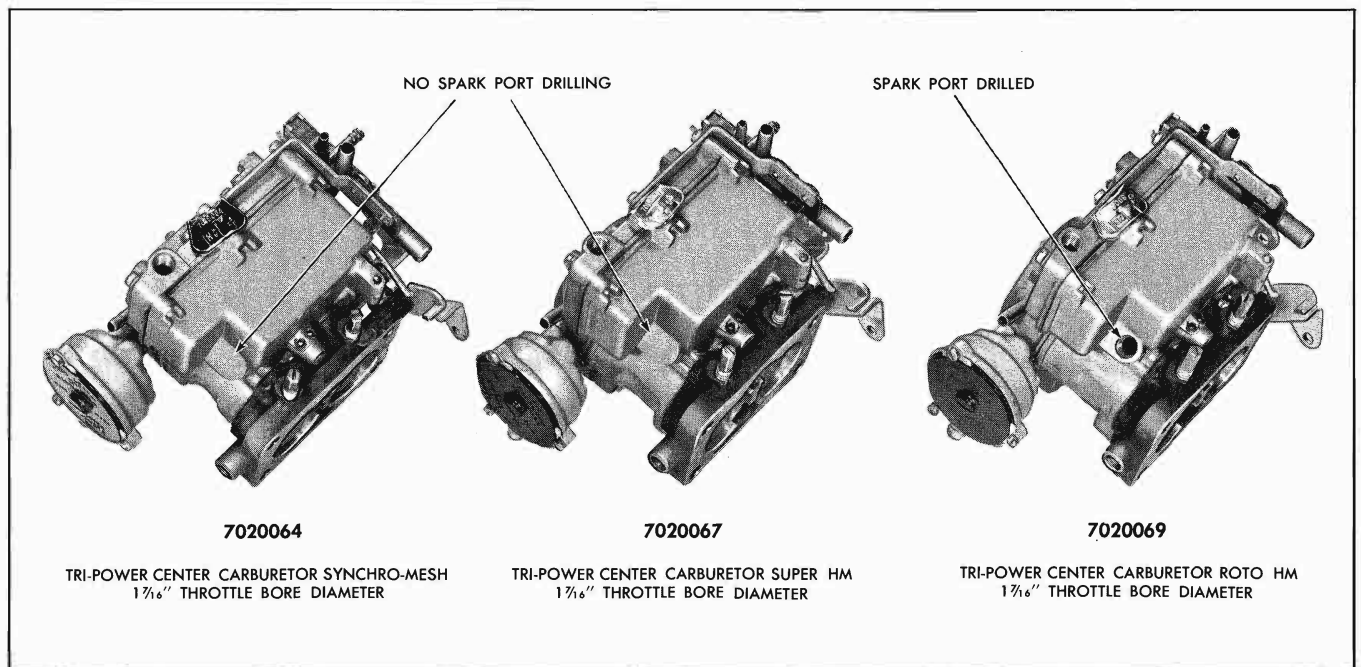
B-63 Comparison of 7020064, 7020067 and 7020069 Carburetors Showing Spark Port Drilling None Are Equipped With Throttle Return Check
